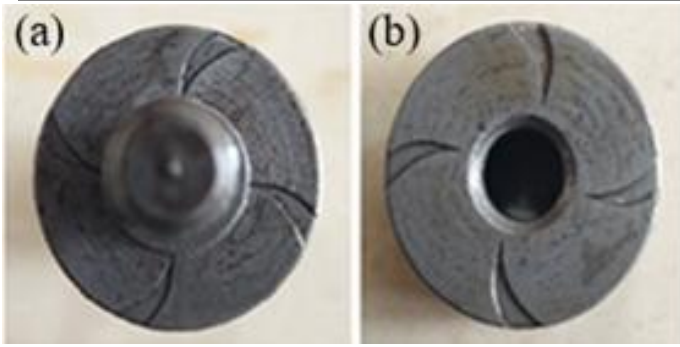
Tool-5, (a) 4 spirals on pin faced surface of top shoulder, (b) 4 spirals on pin faced surface of bottom shoulder
